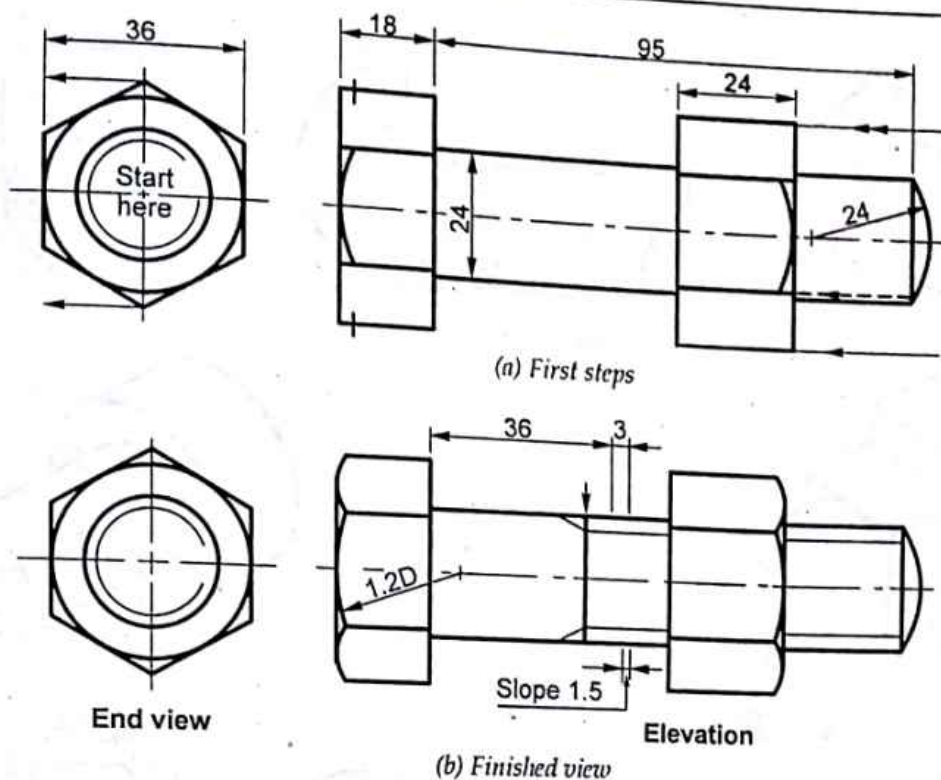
Steps in drawing three views of hexagonal-headed bolt and nut
